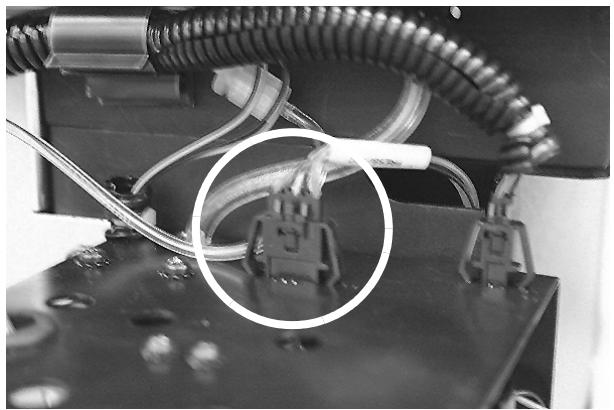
Vacuum/pressure system with cable connection (cover removed)
